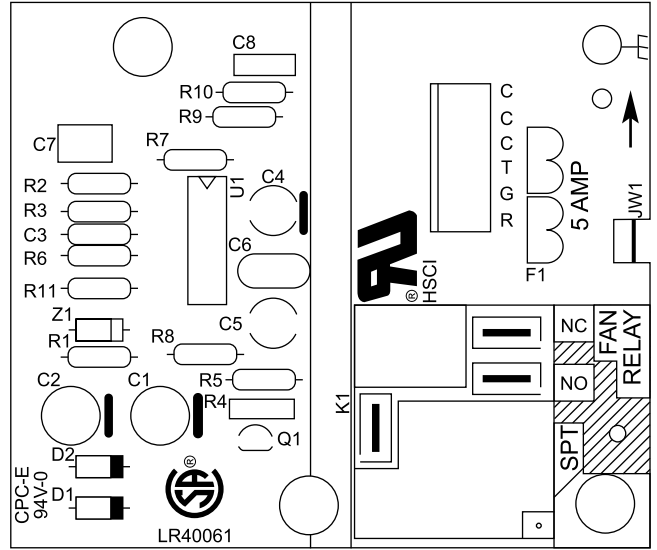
Fan Coil Printed Circuit Board (HK61EA006)
